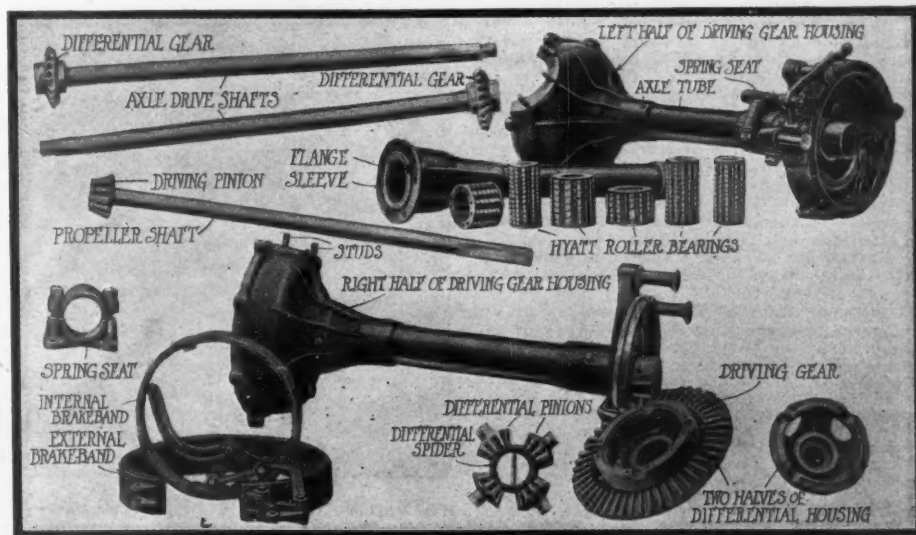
DETAILS OF THE HUDSON REAR AXLE SHOWING THE VARIOUS PARTS THAT COMPRISE THE MAKEUP OF THE MECHANISM
